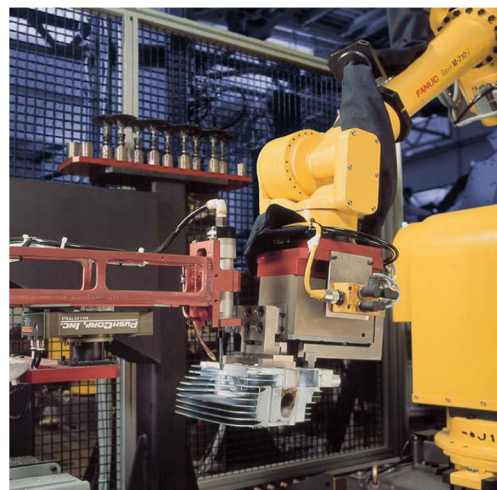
Robot deburring on an aluminum motorcycle cylinder head (Adapted from [117])
